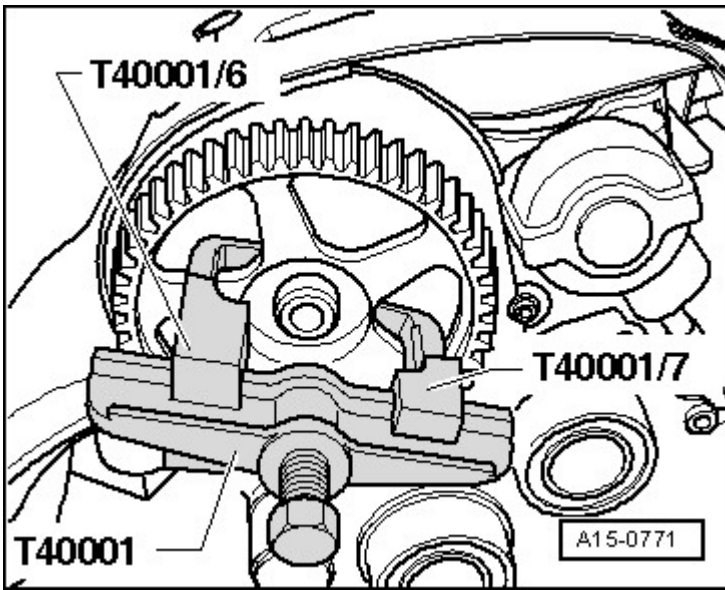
Identifying Puller T40001, Claw T40001/6 And Claw T40001/7
